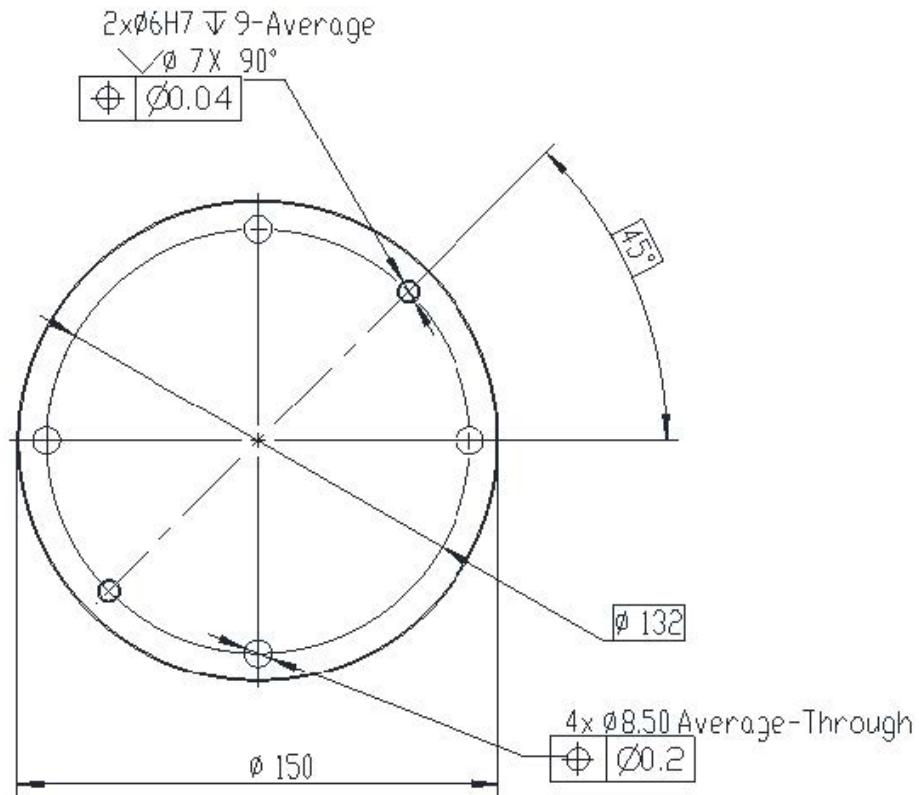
Dimensions of installation holes on the base in millimeters
